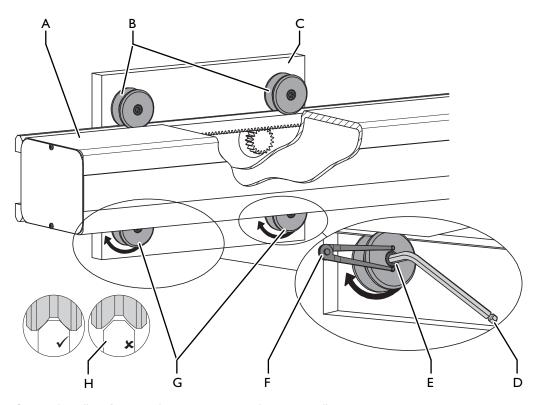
Setting the rollers: Prism guideway, centering and eccentric rollers
